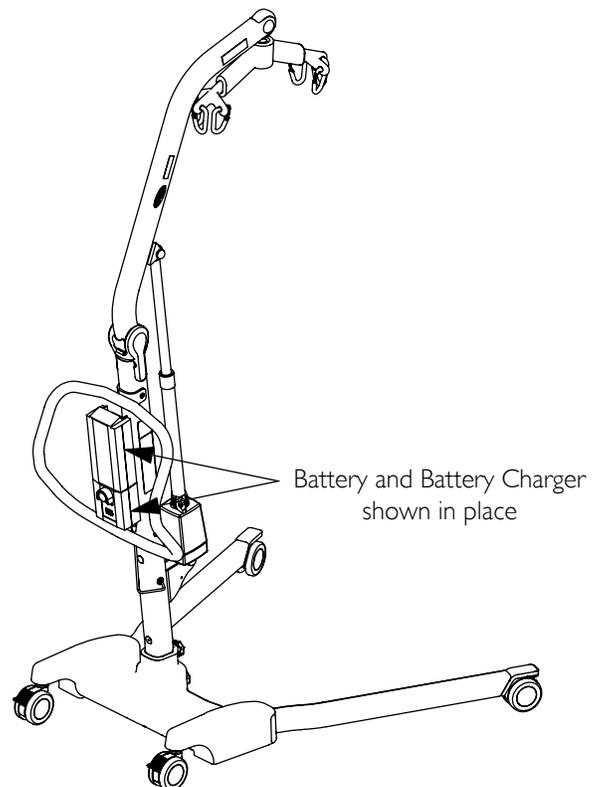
Attaching the Battery Charger to the Mast Assembly
